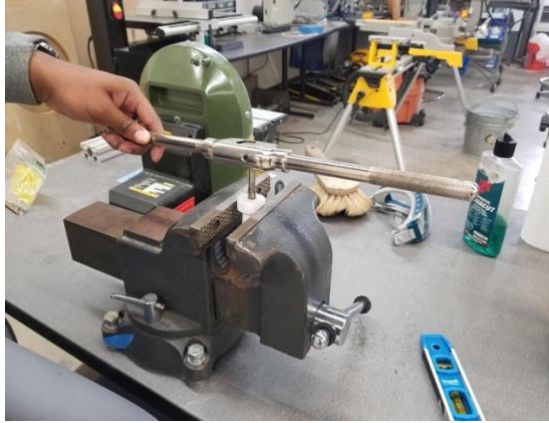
Tapping the Plug Adaptor with a 1/8 Tap
